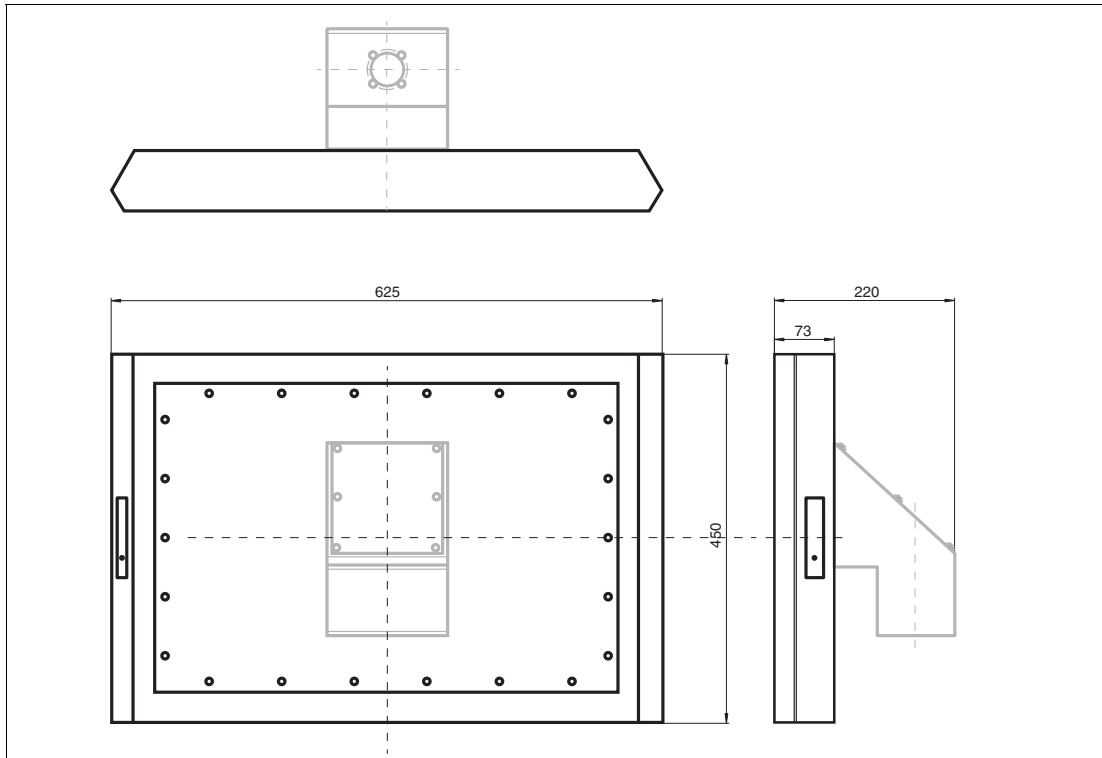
Dimensions VisuNet EX2 GMP PC/RM3722 and PC/RM3721, EX2 mounting bracket is not enclosed in scope of supply (thus pictured grey)
